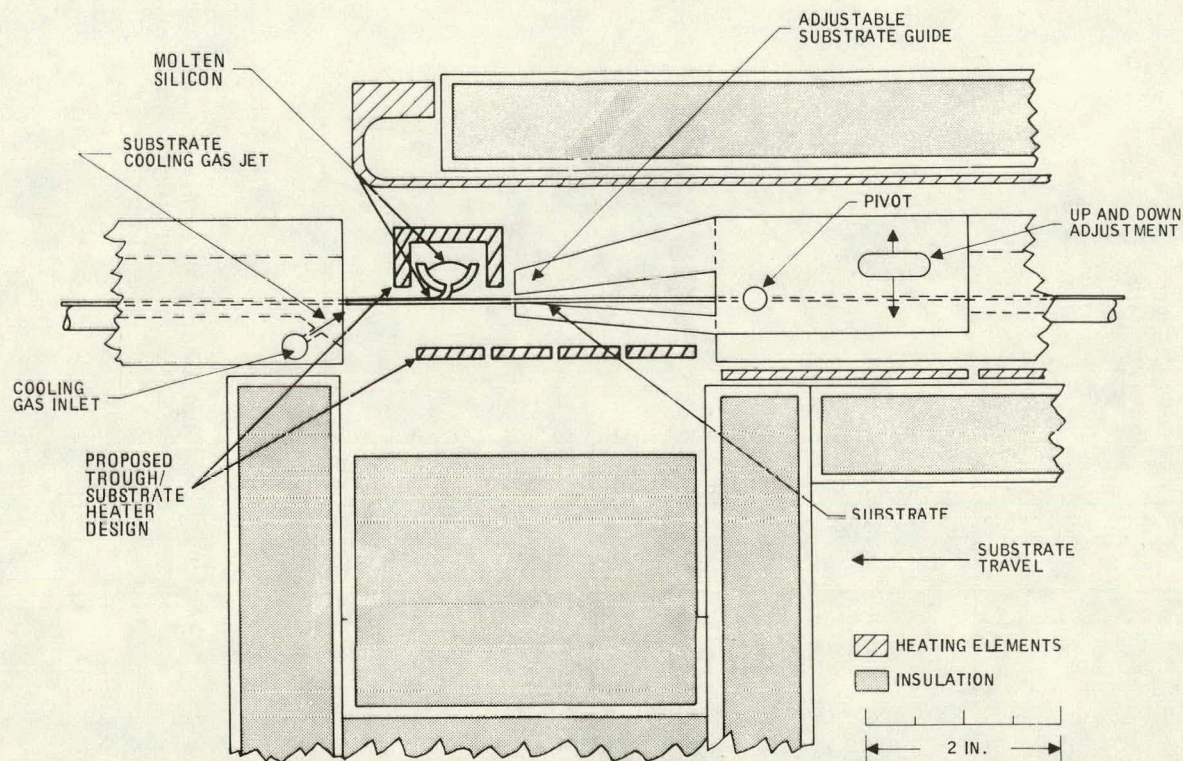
Growth Chamber Cross-Sectional Drawing of Proposed Top-Coating Technique
